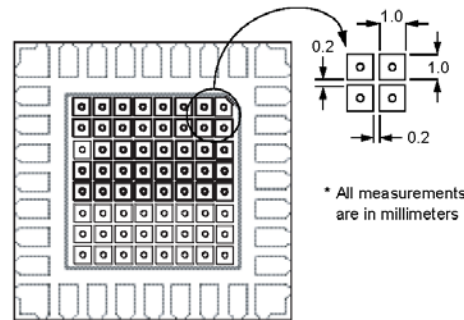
Surface Mount for Power PQFN with Exposed Pads
